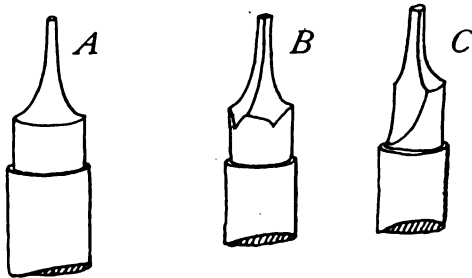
REAMERS FOR MAKING INJECTOR CONES.
